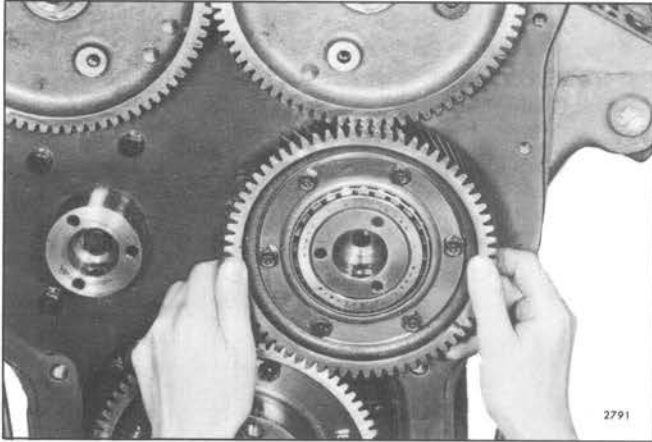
Installing Idler Gear, Hub and Bearing Assembly
